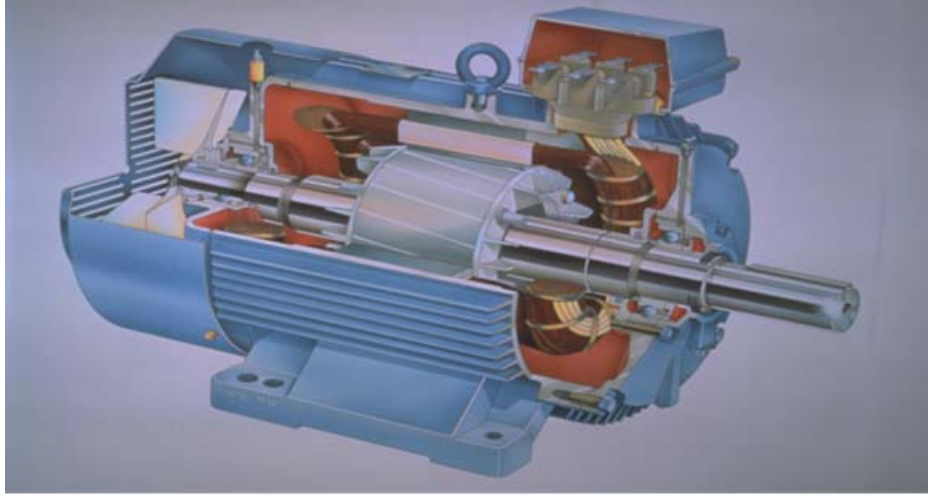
Squirrel Cage Induction Motor [From Ref. 7].
